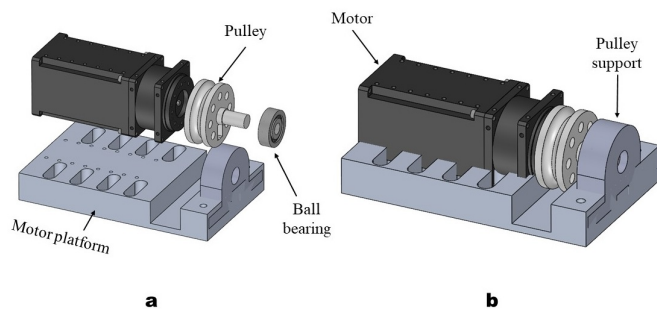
Tensegrity robot actuation unit a) Exploded view b) Assembled view
